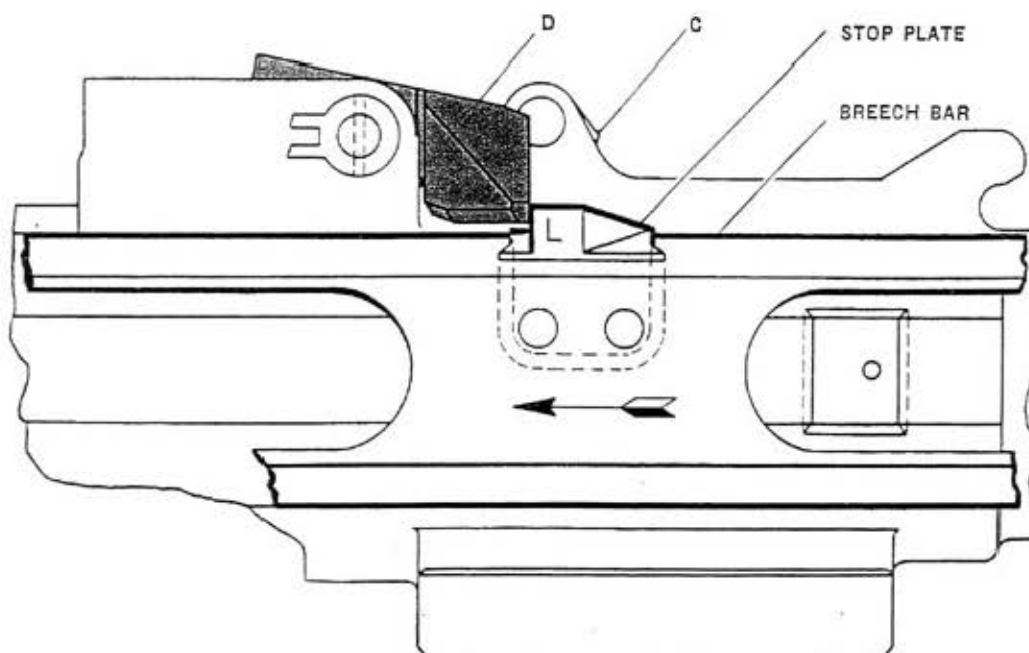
Double Loading Stop Gear. Counterrecoil is arrested by the stop plate bearing against the double loading stop
